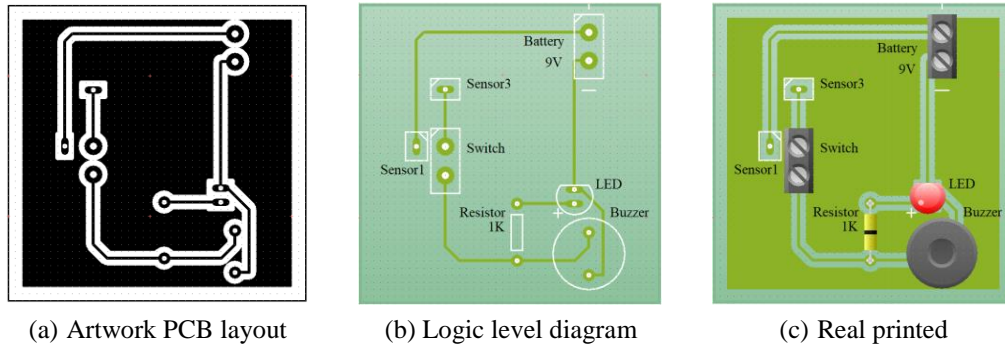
Design of the printed circuit board (PCB) for the wireless electro-syringe injection system
